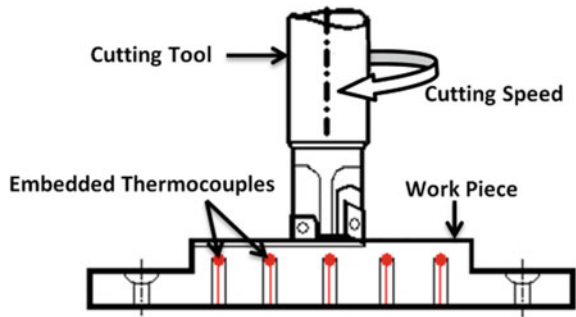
Tool/workpiece thermocouple experimental setup [31]
